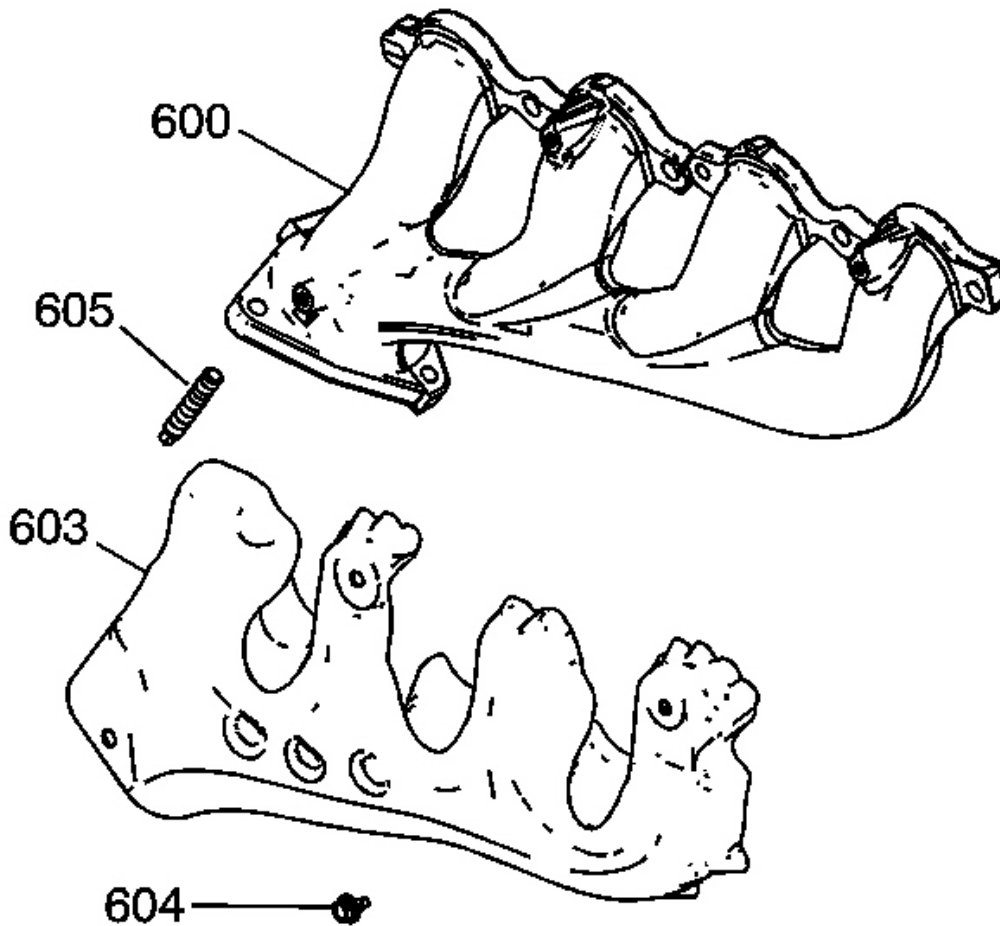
View Of Right Exhaust Manifold & Heat Shield
